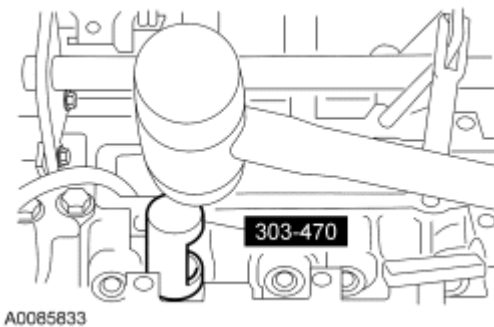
Installing Valve Seal Using Special Tool (303-470)
